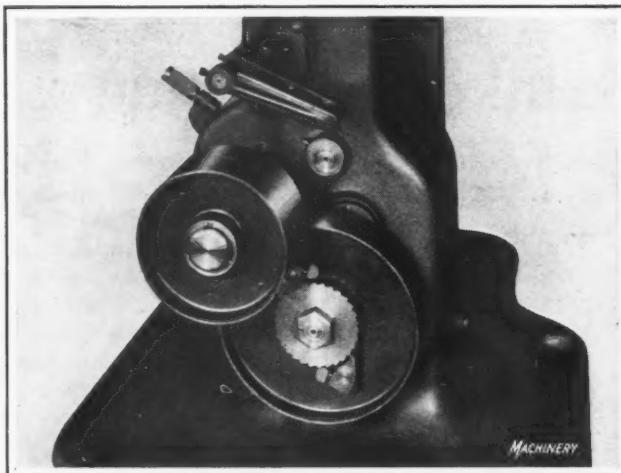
Pawl and Ratchet Arrangement for transmitting Motion from Gear-box to Spindle Driving Pulley
